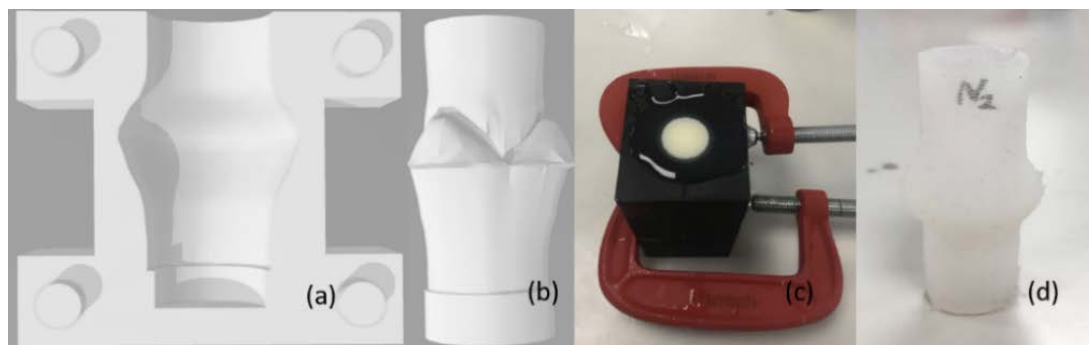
Two-part mould-based silicone valve manufacturing: (a) external mould, (b) internal mould, (c) two-part mould assembly and (d) a normal silicone valve.
